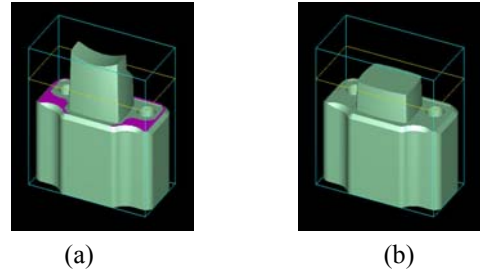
(a) The entire cutting plane option and (b) the part after removing the damaged feature
